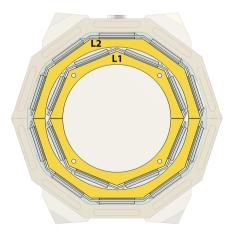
Holding end-pieces and end-rings of the inner layers with the octagonal (layer 1) and decagonal (layer 2) geometry, shown in yellow.
